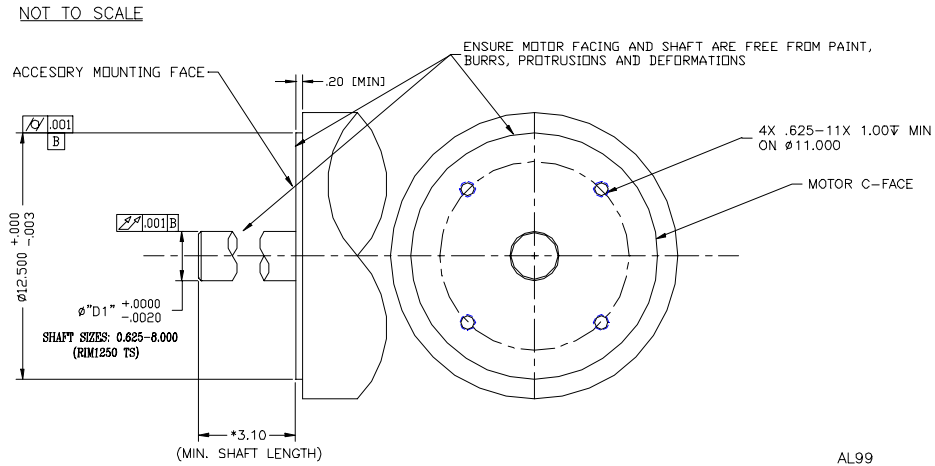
Typical 12.5 Inch Diameter Type C-Face Motor
